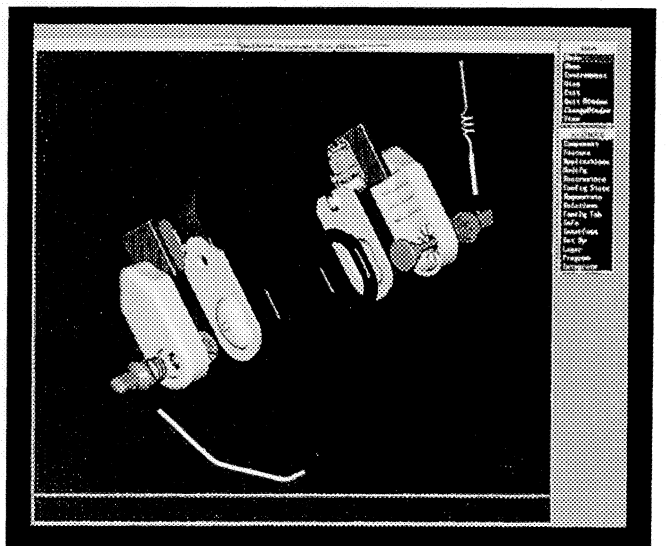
Exploded Shaded Assembly of a Headset
